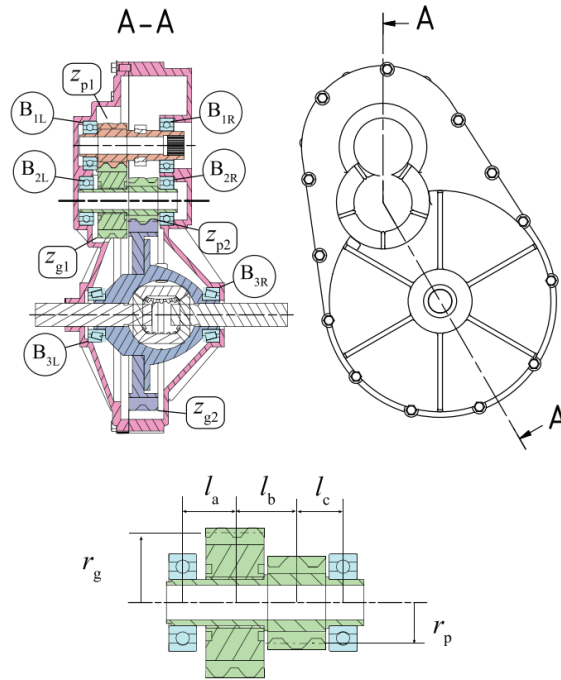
Two stage reducer with housing and intermediary shaft. Top left: Section view of CAD model of the reducer. Top right: Top view of the housing. Bottom: intermediary shaft with its gears and bearings. Reproduced with permission from Paper VI.
